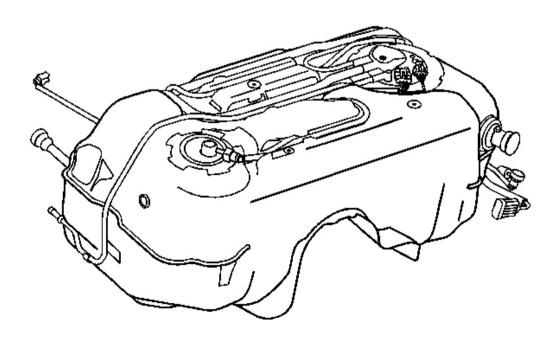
View Of Electrical Connectors From The Primary Fuel Pump Module Courtesy of GENERAL MOTORS CORP.
